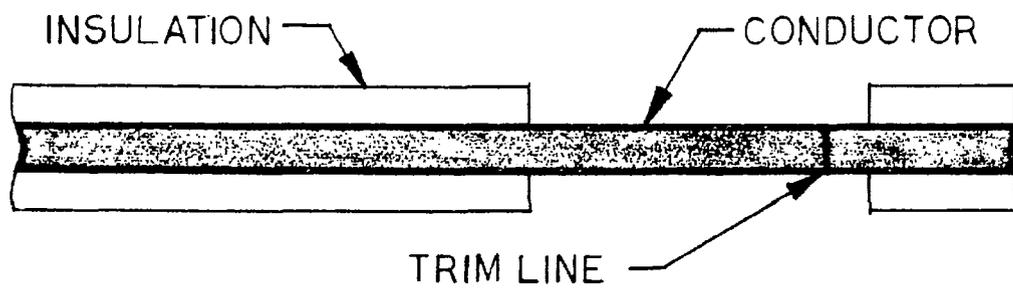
Unshielded cable stripped with plane stripper.
